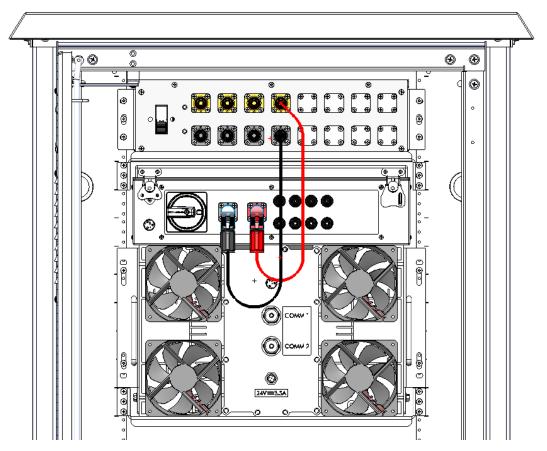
SURLOK CABLING ROUTED TO PRIMARY (INPUT) ON FEED #1
